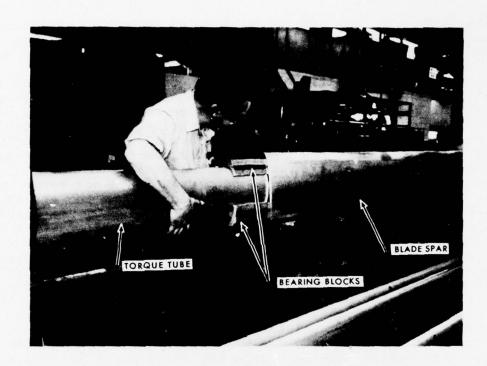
Full-Scale Torque Tube and Outer Blade Spar.
